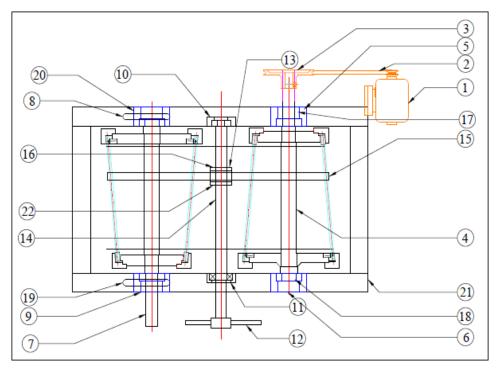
Detail Assembly of Alternative Fixed Pitch CVT
